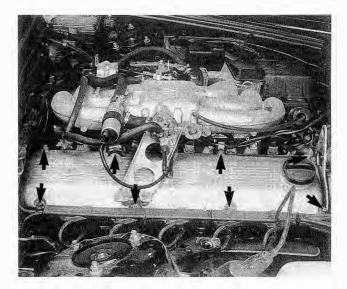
Breather hose and cylinder head cover mounting nuts on 325e engine (arrows).
